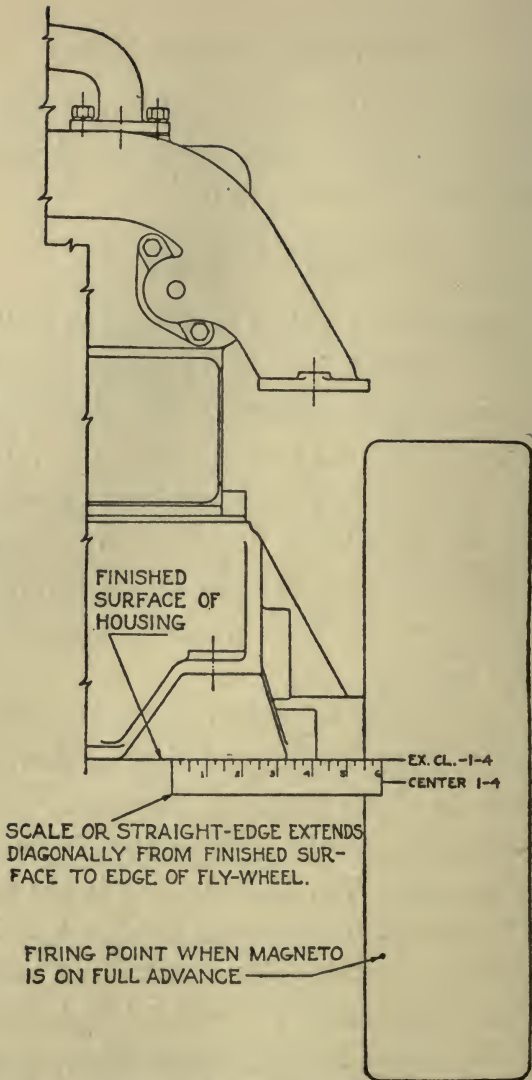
VALVE TIMING, USING MARKS ON FLYWHEEL
